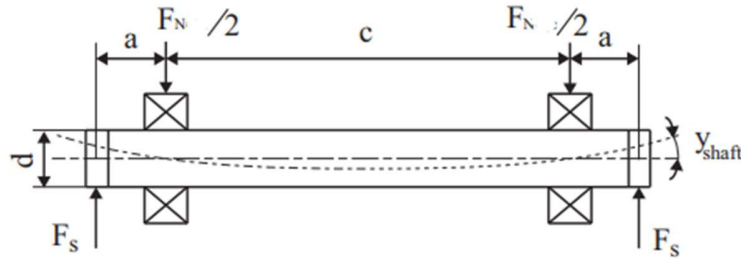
Schematic cutaway of an idler shaft considering the bearings do not transmit any moment [23]
